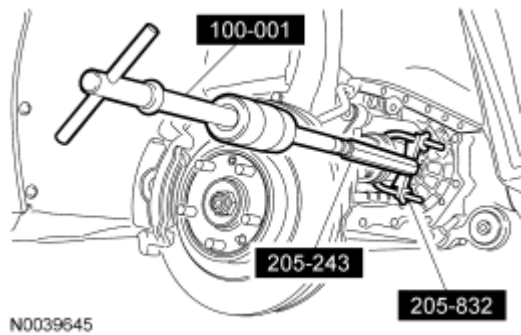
Identifying Special Tools (100-001, 205-243 And 205-832)
